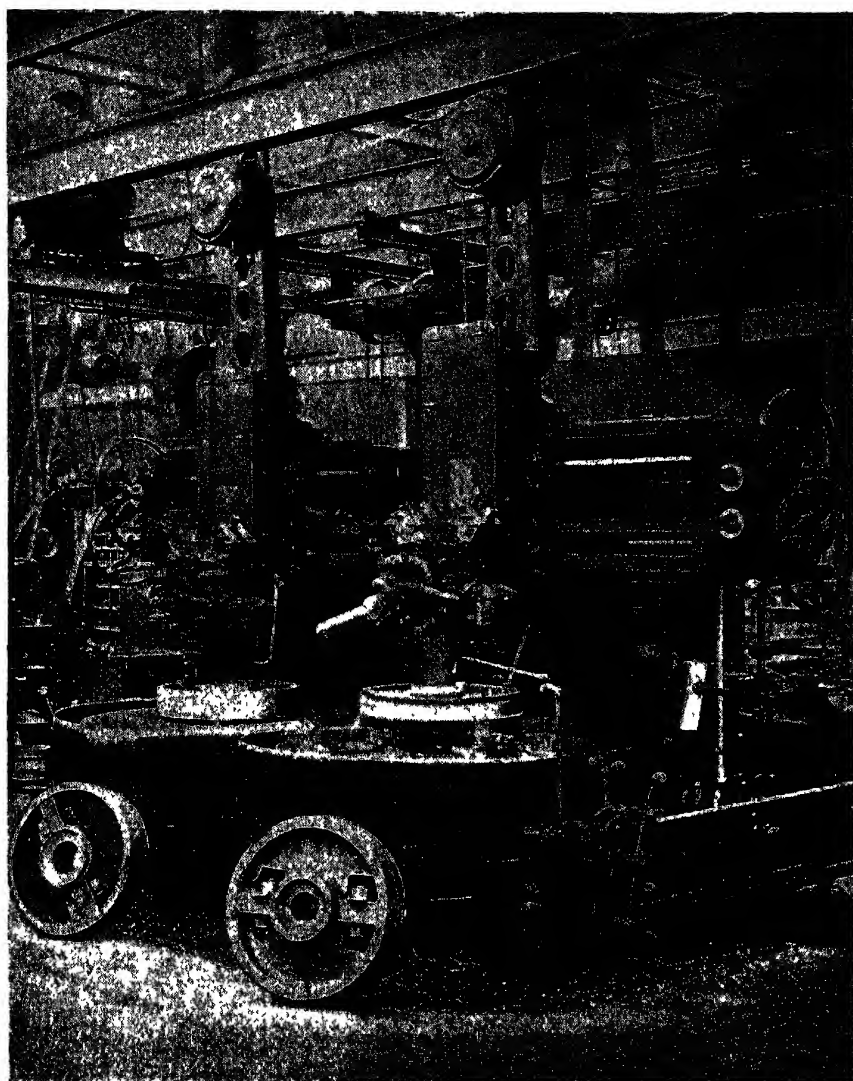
SIX-SPINDLE ASQUITH HONING MACHINE
